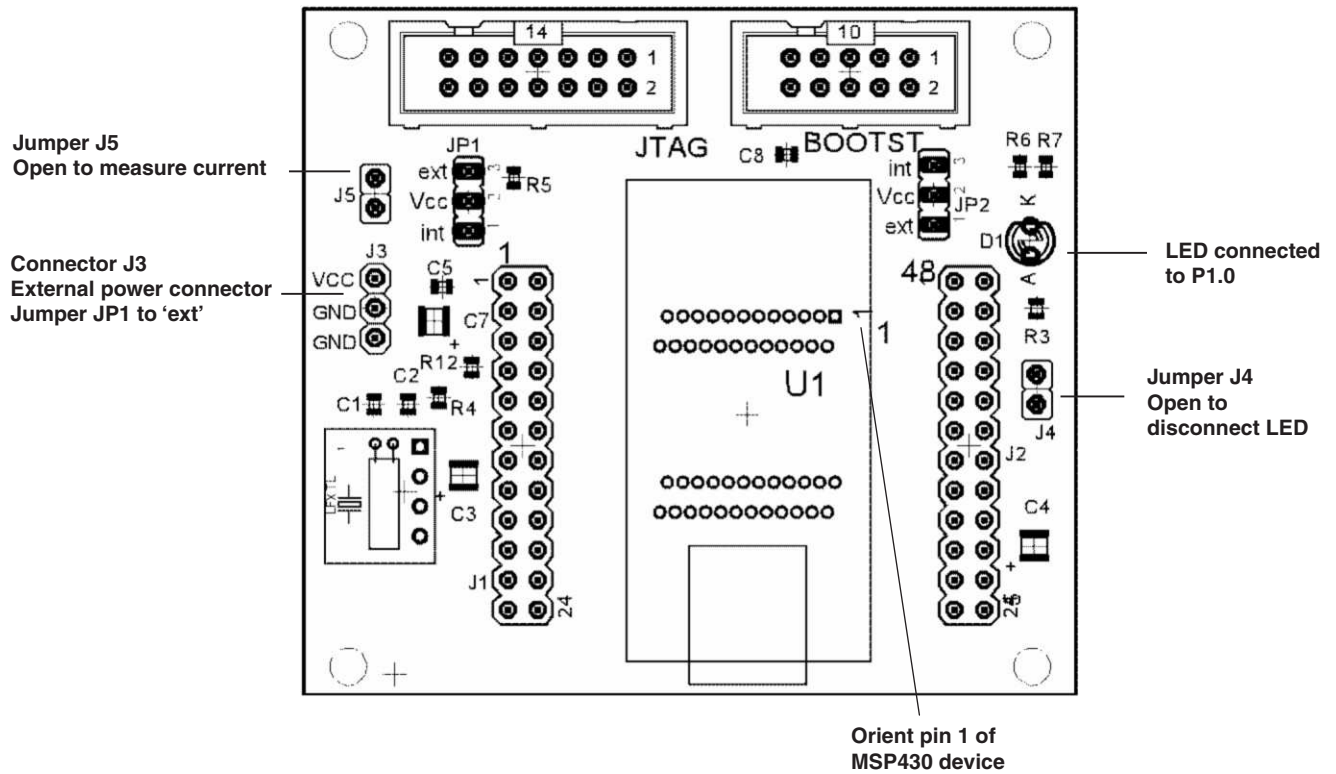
MSP-TS430DL48 Target Socket Module, PCB
